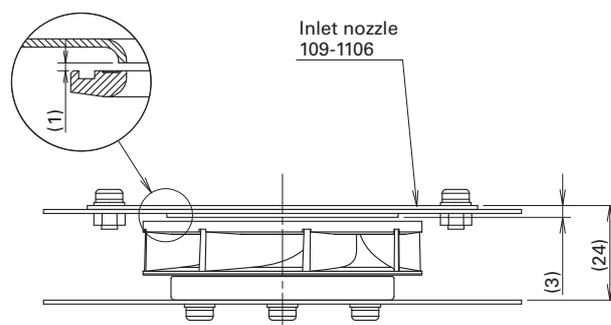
Dimensions of new model with inlet nozzle installed (unit: mm)
